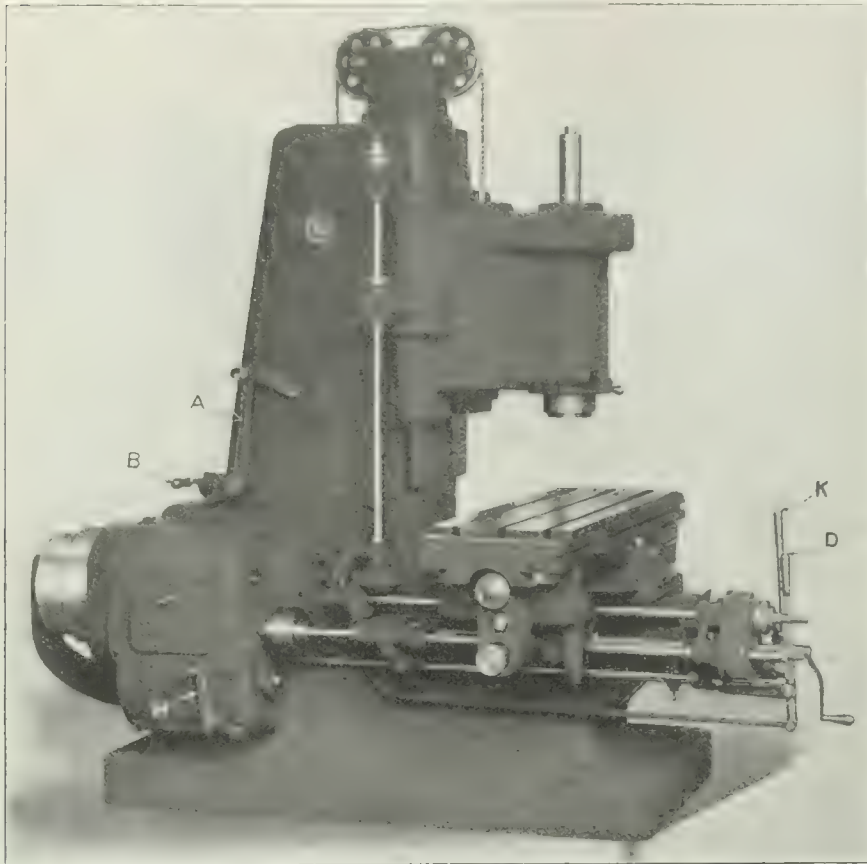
The New Vertical Milling Machine Built by the Rockford Machine Tool Company, Rockford, Ill.
